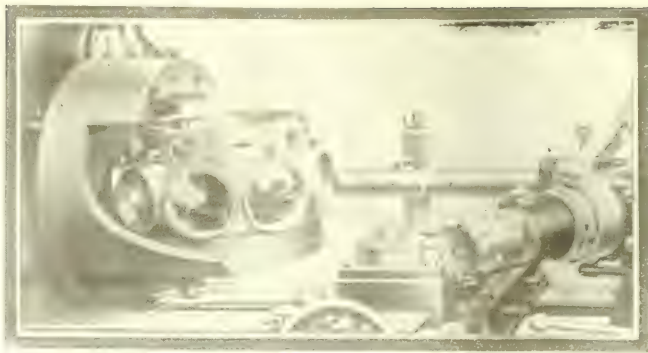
INDEXING FIXTURE FOR WATER-COOLING CYLINDER
